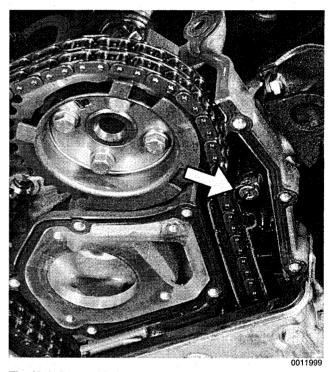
Left upper chain guide adjusting sleeve (arrow). Note camshaft position
